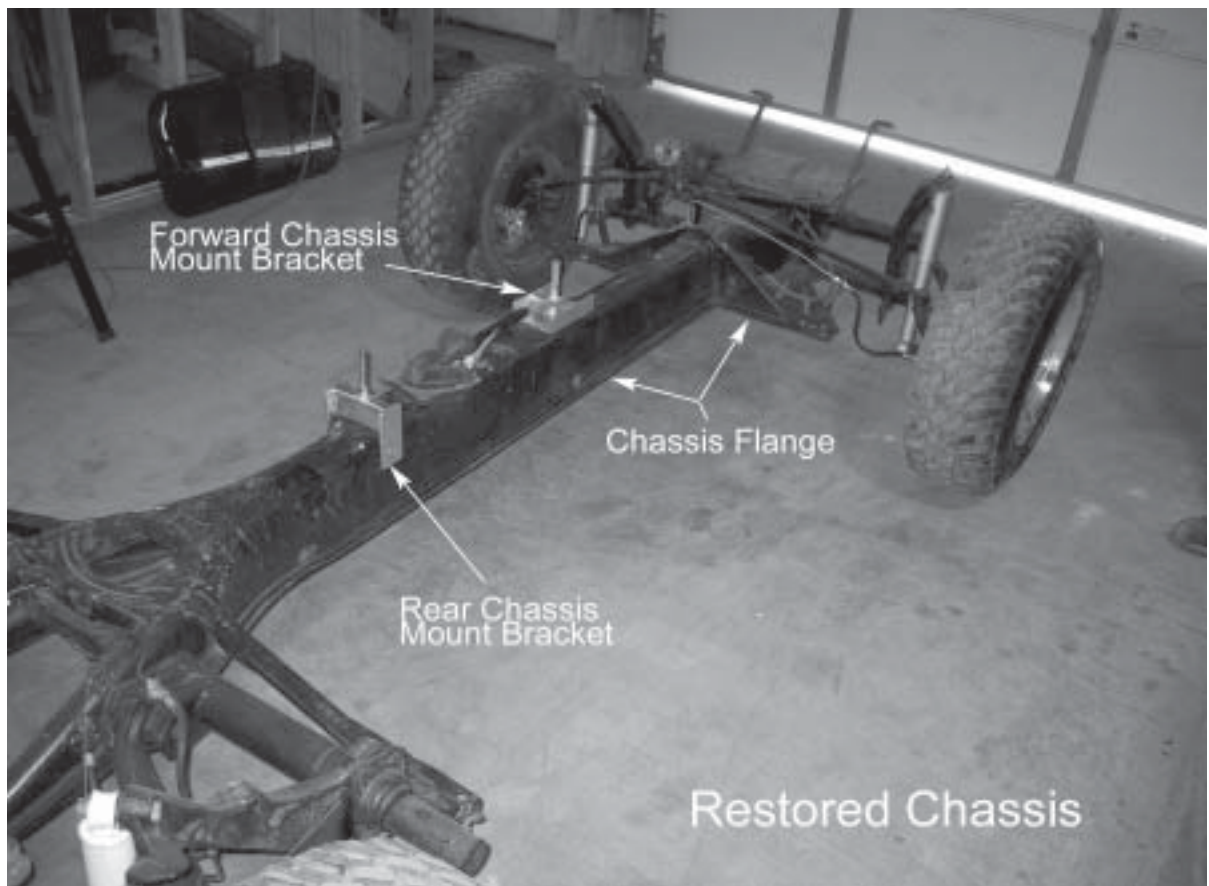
Refurbished chassis with floor pans removed. Bonding fixtures are in place. Rear clamping fixture fixes to the seatbelt mount holes. Front clamping fixture fixes to the shifter mounting holes. Picture is inaccurate as we recommend using stock size used tire/wheel during the complete build up process. The smaller tires allow easier access to the chassis.
